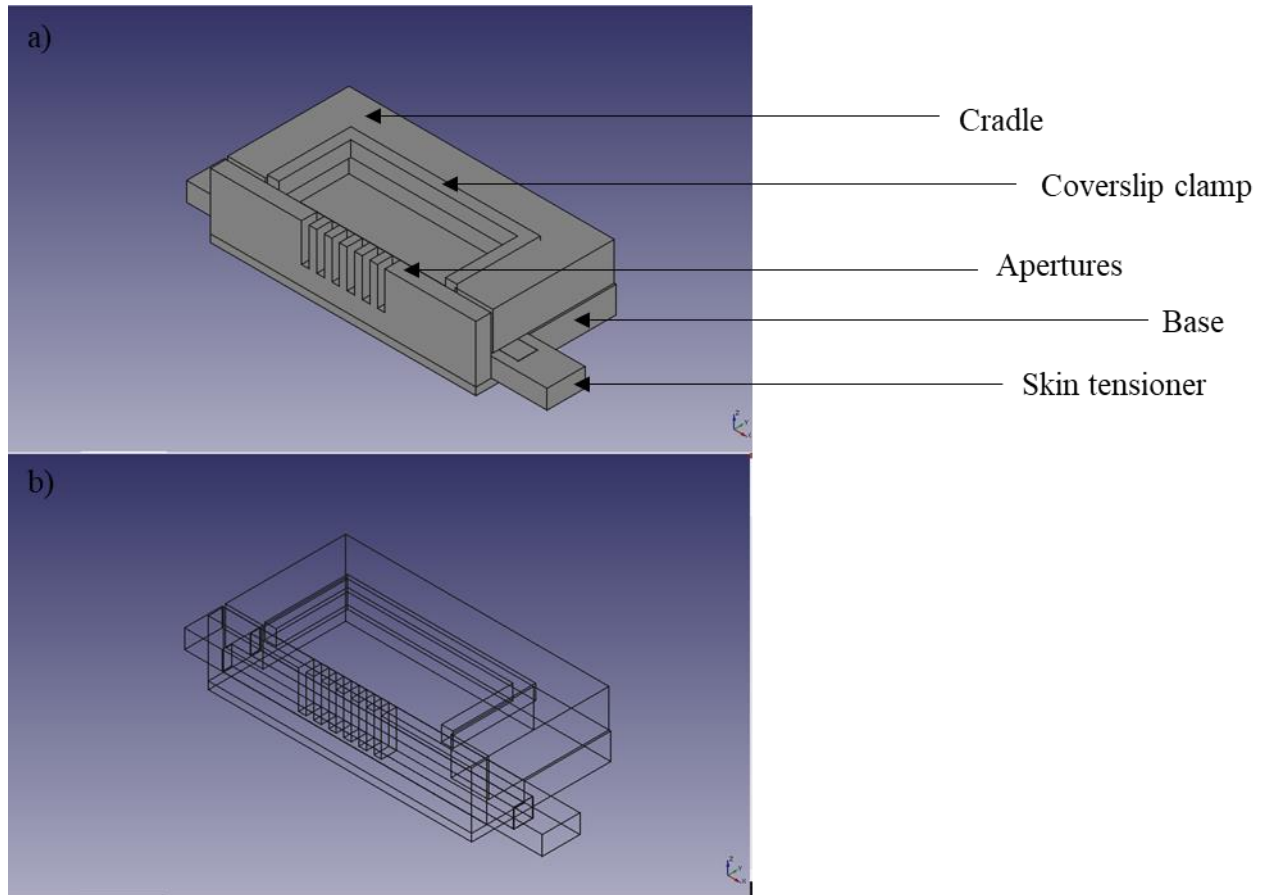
CAD design of the skin cassette. a) 3D padded model. b) 3D Wire frame model
